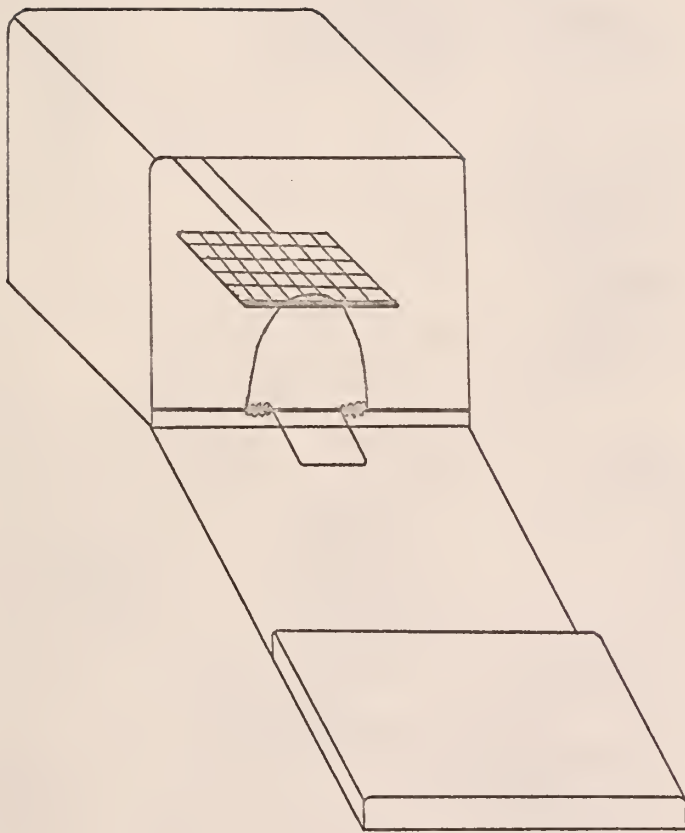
A foot-pedal guard with a spring closing entry plate.
